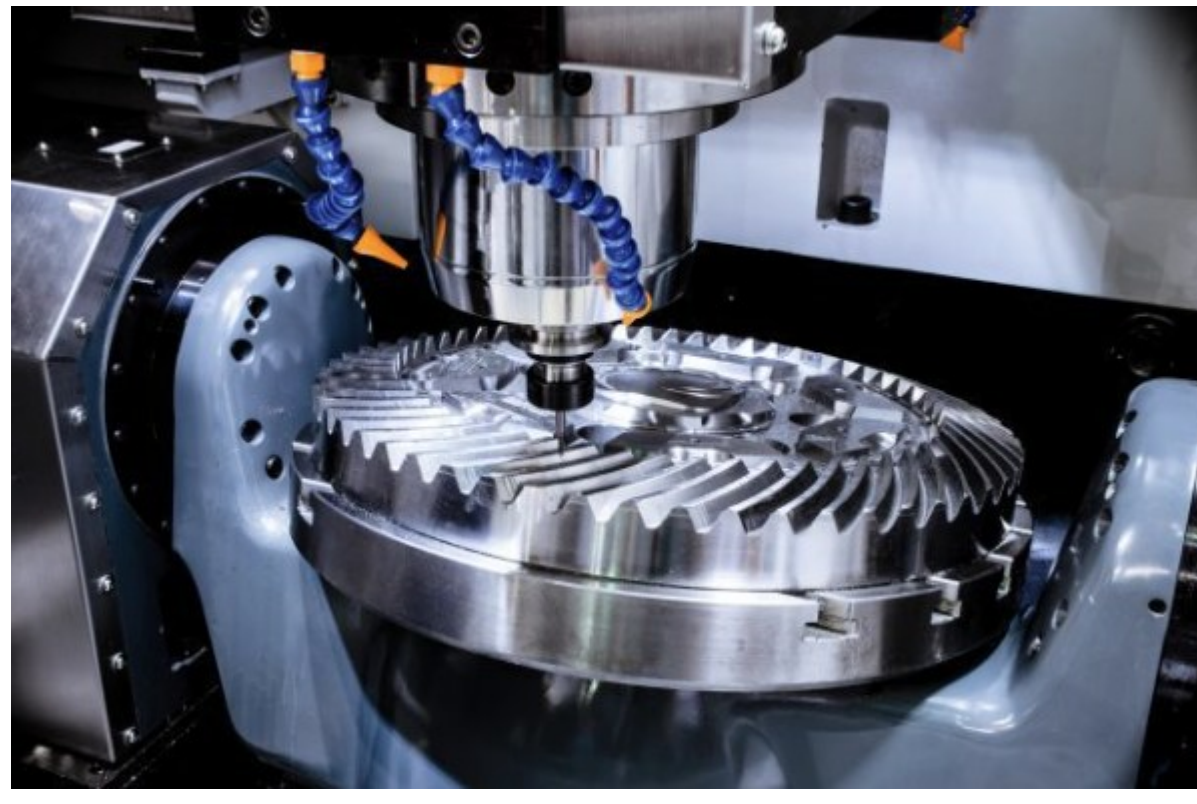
5 axis Computer Numerical Control machine cutting cogwheel
